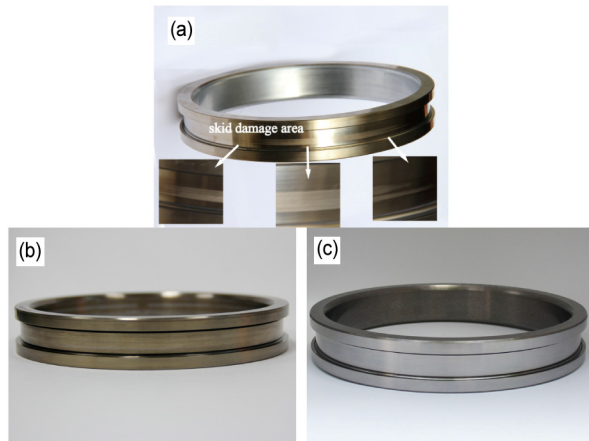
Surface of inner ring (a) with and (b) without damage; (c) shows a new inner ring.
